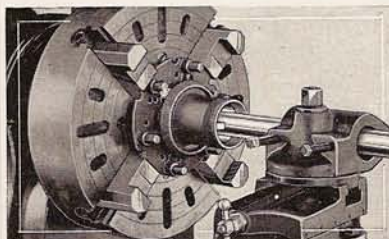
Boring a Welded Wheel Hub to Form a New Bearing Cup Seat.
